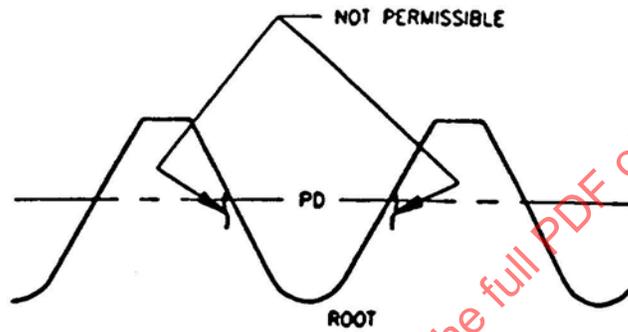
Laps Below PD Extending Toward Root, Rolled Thread
